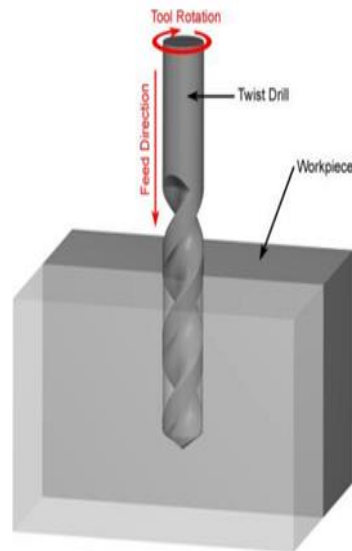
Drilling process in which the drill is fed into the workpiece [11].
